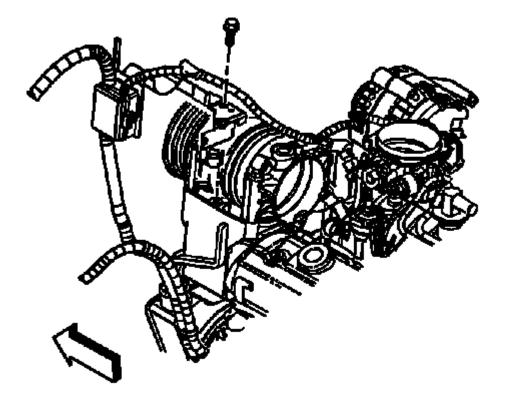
View Of Junction Block Bracket Bolts Courtesy of GENERAL MOTORS CORP.
